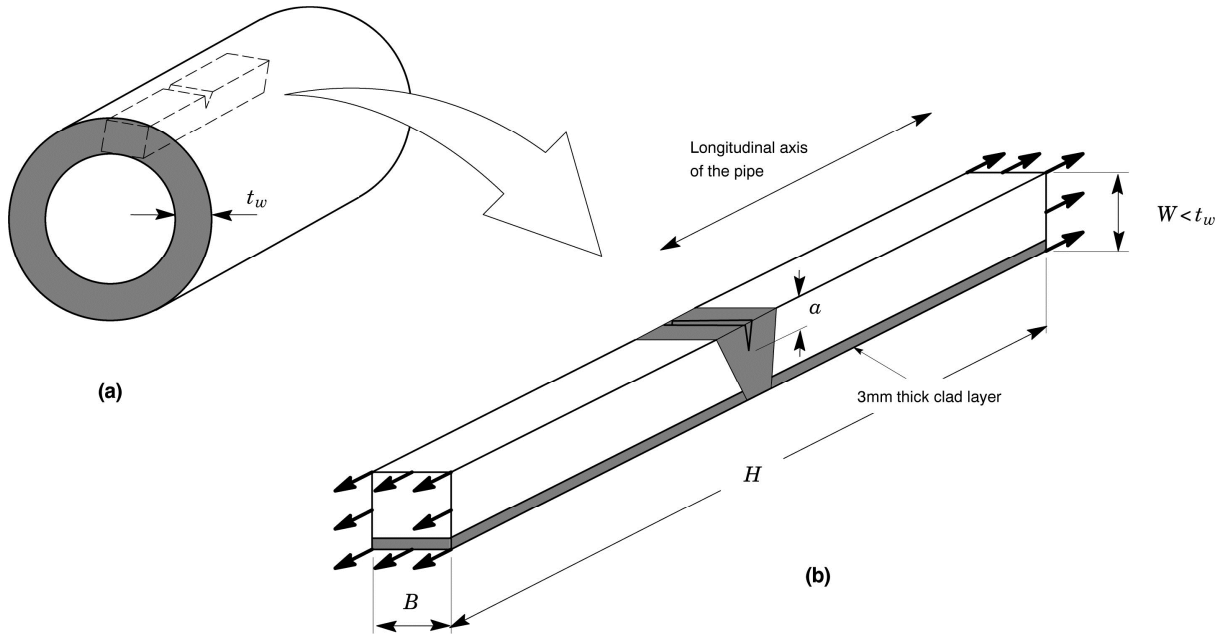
Geometry of tested weld centerline notched SE(T) specimens with fixed-grip loading extracted from the girth weld of the pipe specimen in the longitudinal direction.
